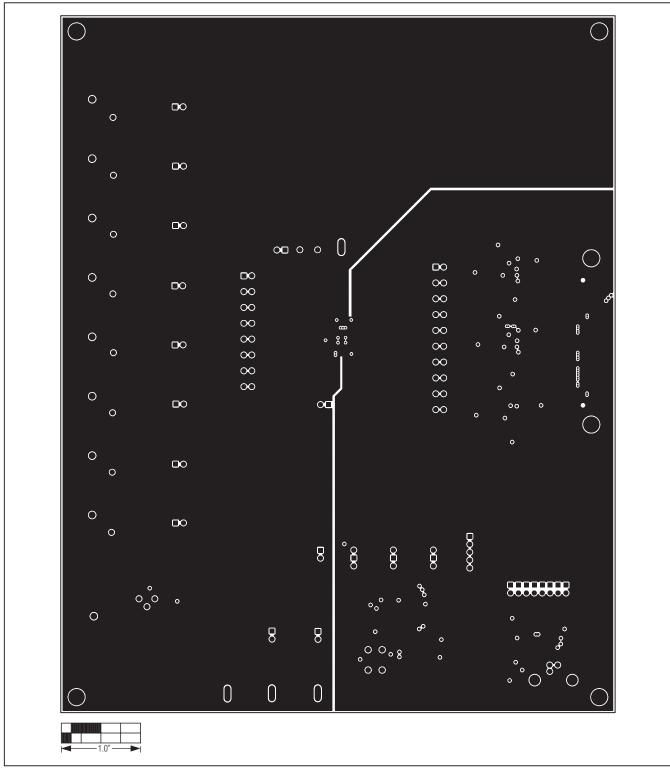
MAX19527 EV Kit PCB Layout (Inner Layer 2)—Ground Planes
